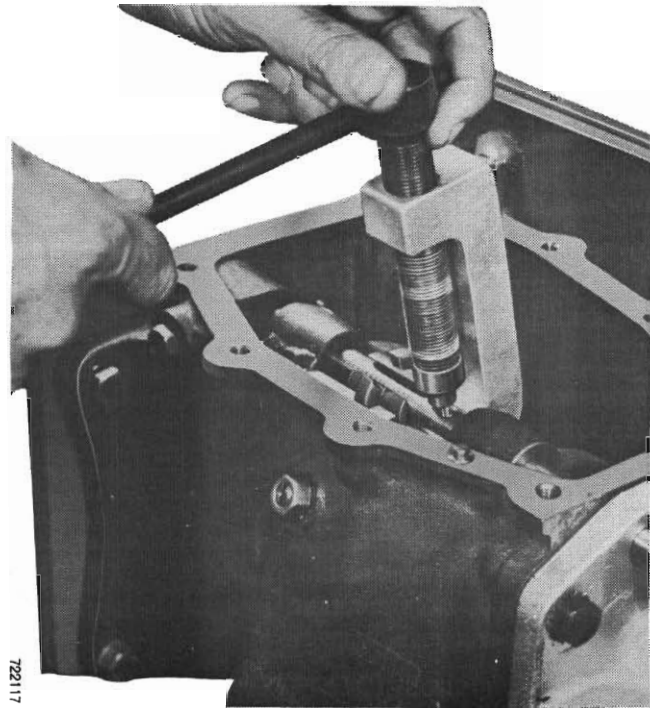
Replacing gearshift rail operating pin—using tool No. E21C20.
